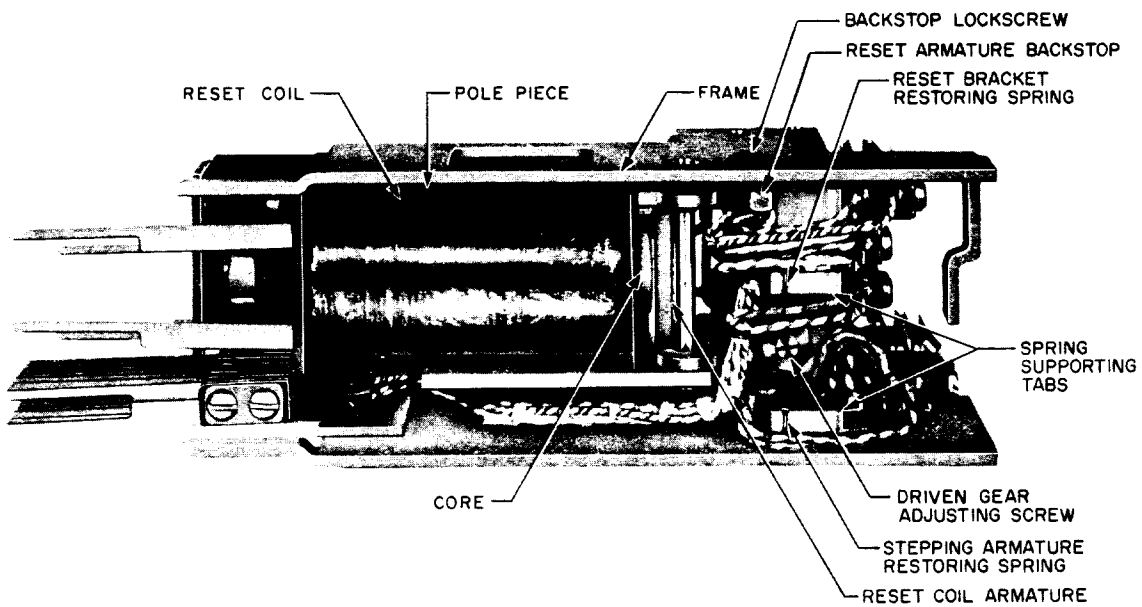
3-Type Counter — Left Side View (cover removed)
